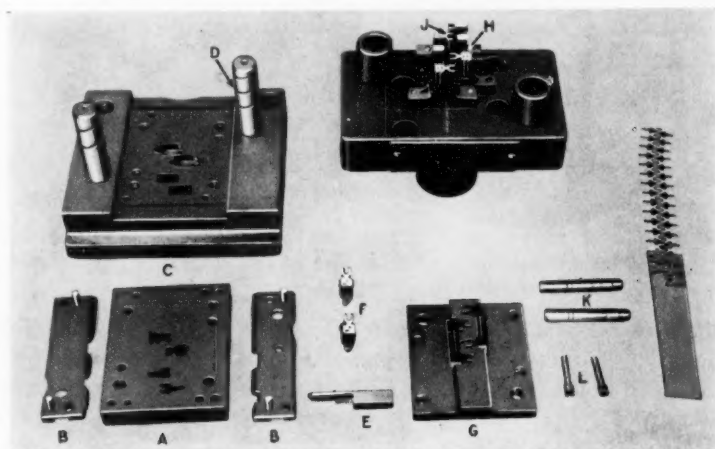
Punch and die for shearing, blanking, and forming solderless cord tip
